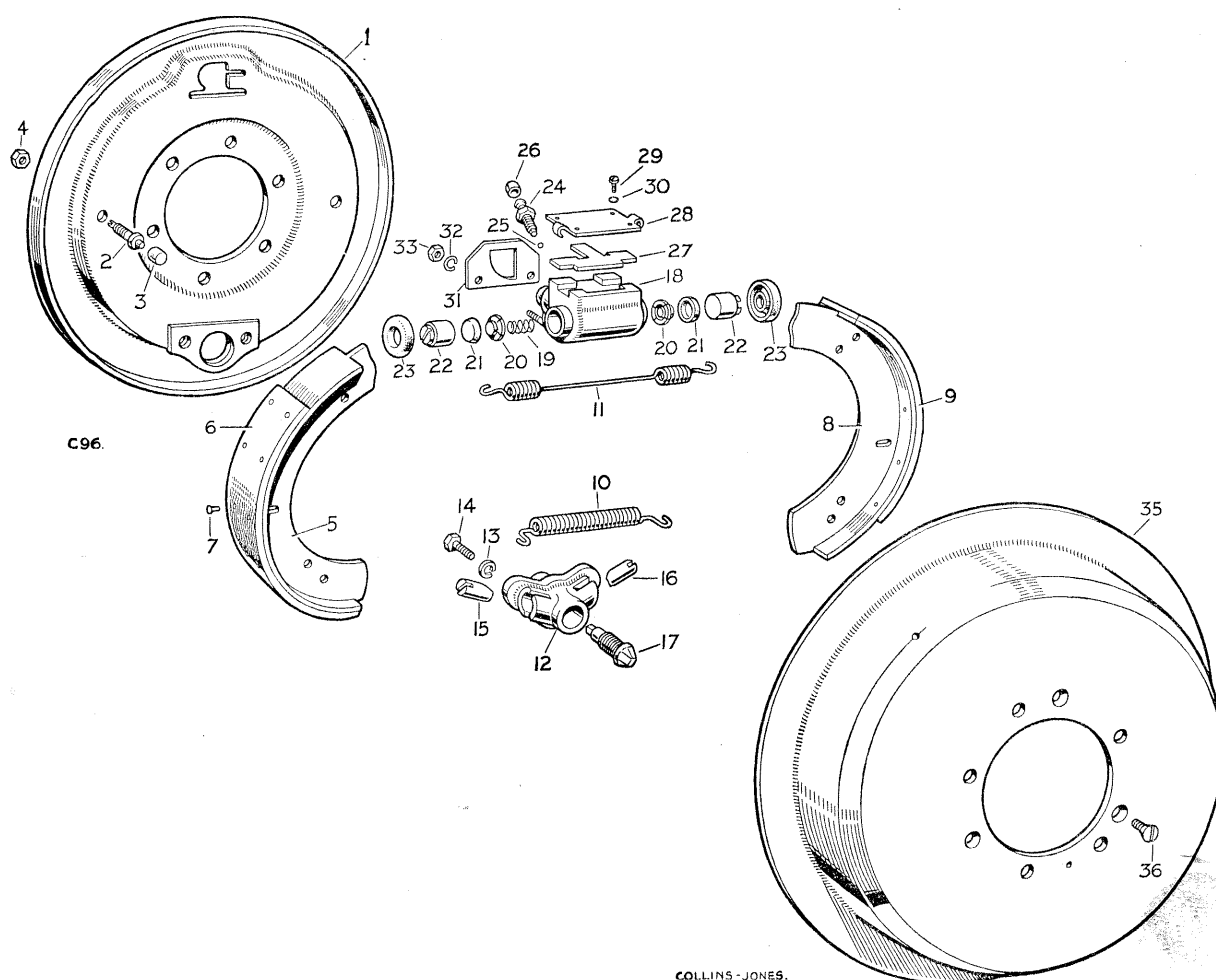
Layout of rear wheel brake unit, 11" brakes—109 models
